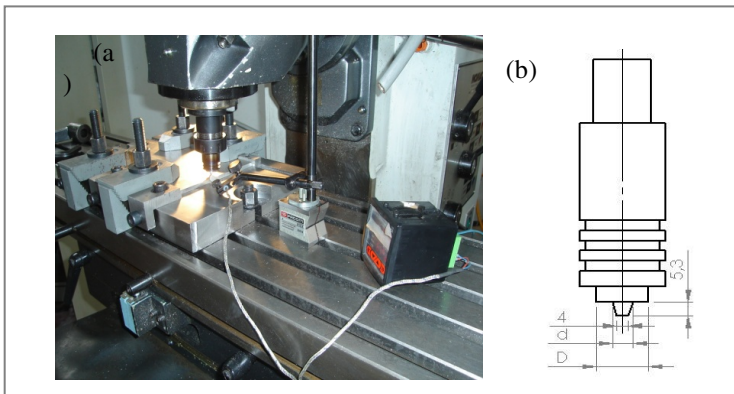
(a) The clamping devices and (b) The welding tool shape
